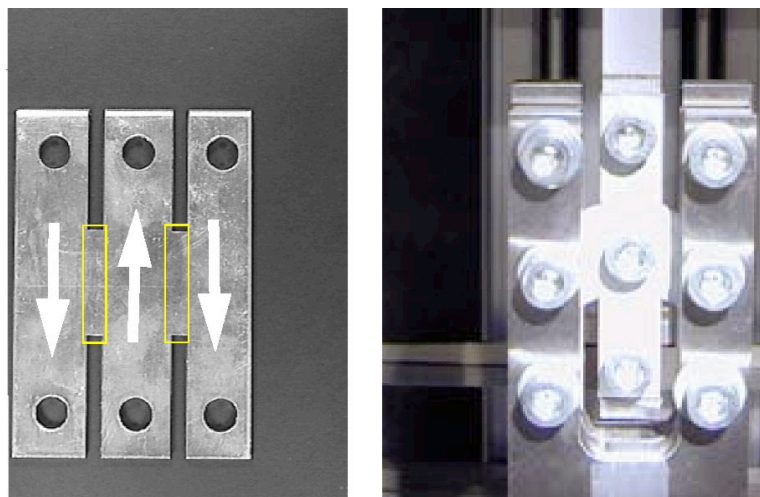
Shear test according to Miyauchi: (left) test specimen, (right) specimen fixture. Hora et al., 2000.
